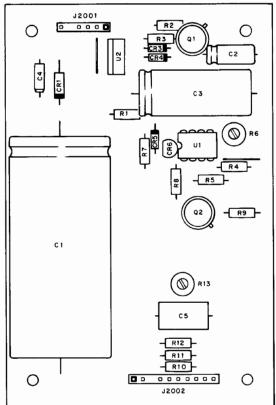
TF-30 Tune Fixture Assembly (Sheet 2 of 2)
